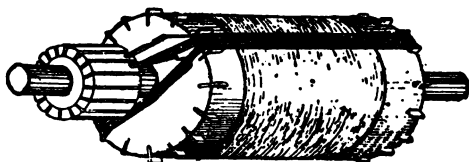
Drum Armature Showing the Method of Winding a Coil.
